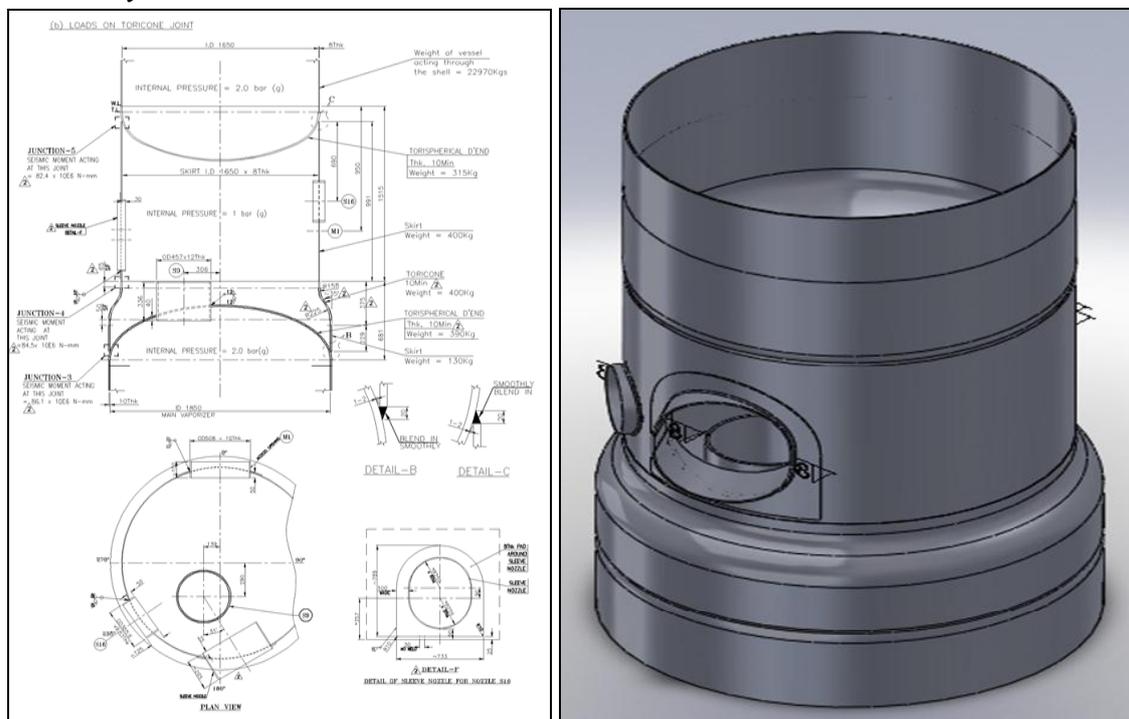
CAD drawing and model of the Tori Cone Joint.
